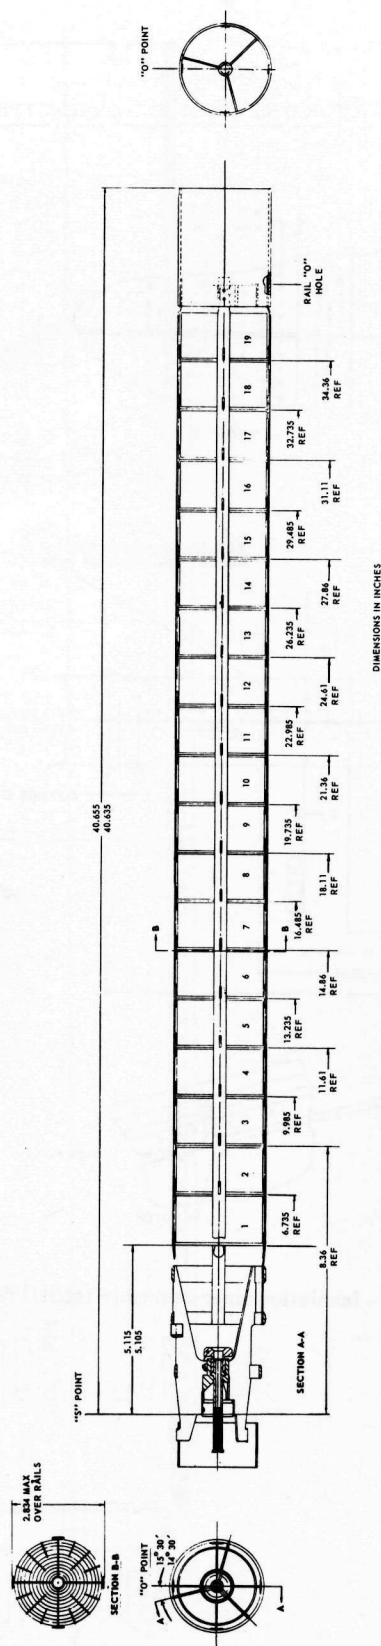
Side view of fuel cartridge assembly (7018R94)
